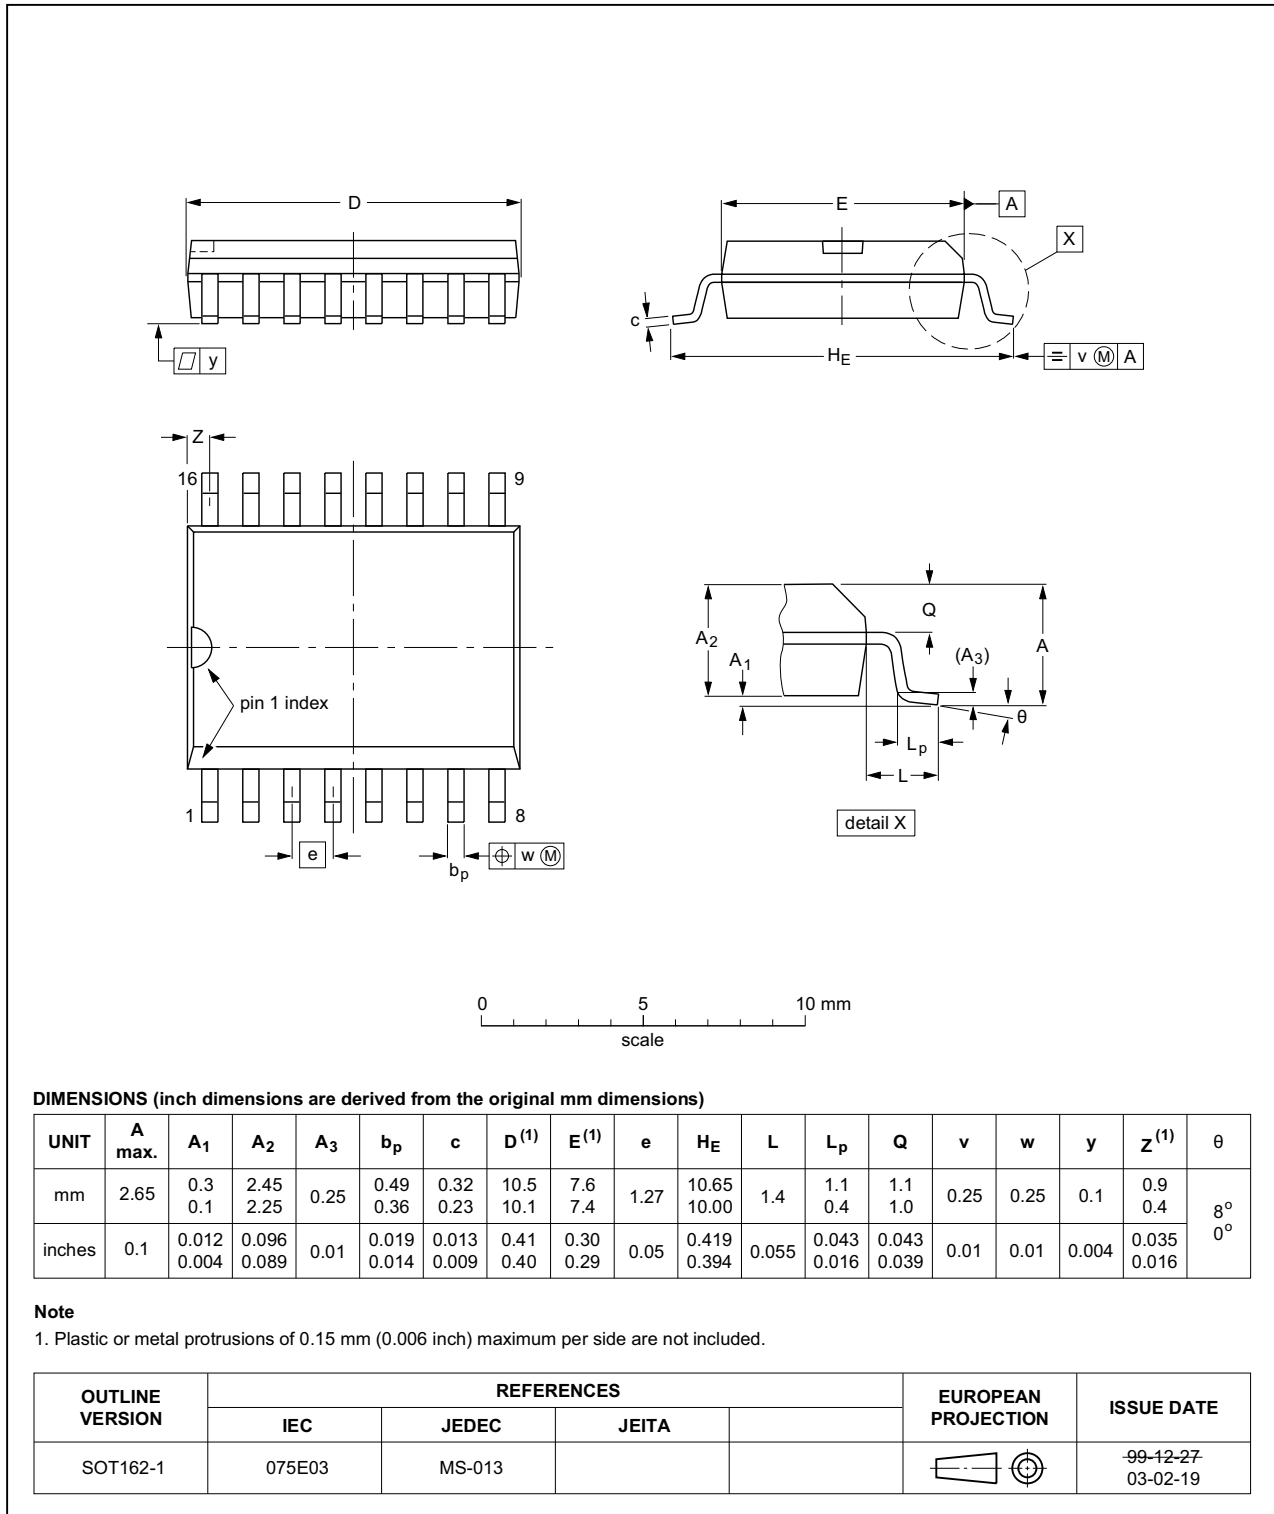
Package outline SOT162-1 (SO16) of PCF2127T
